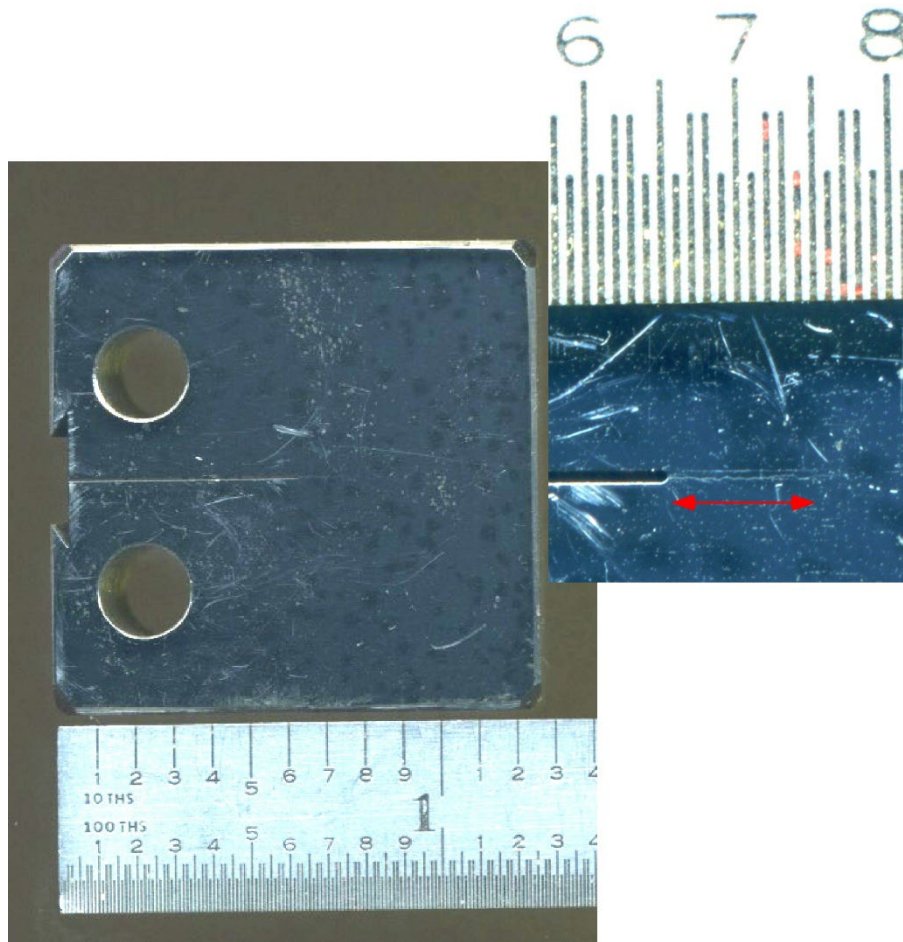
CT specimen with wire EDM notch and polished surface. Inset shows ~0.1 in. fatigue precrack at base of notch
